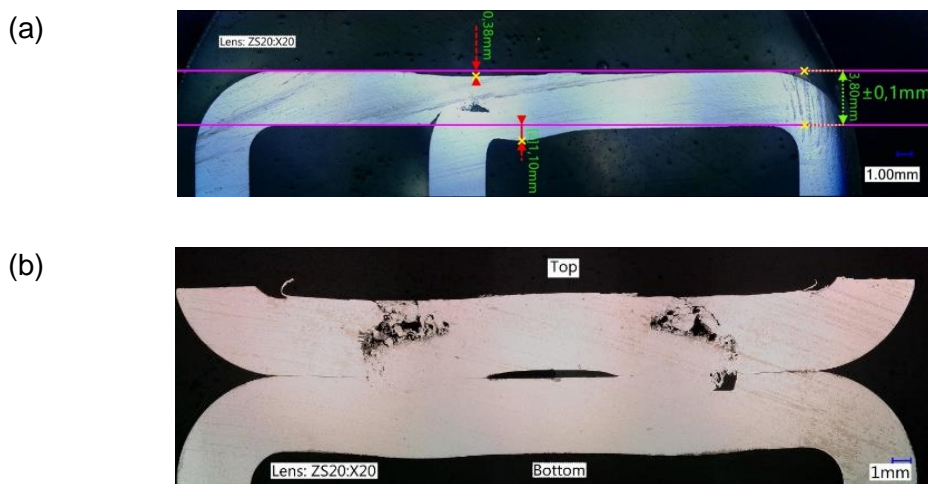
Defects and deformation in FSW ME21-ME21 joints:
